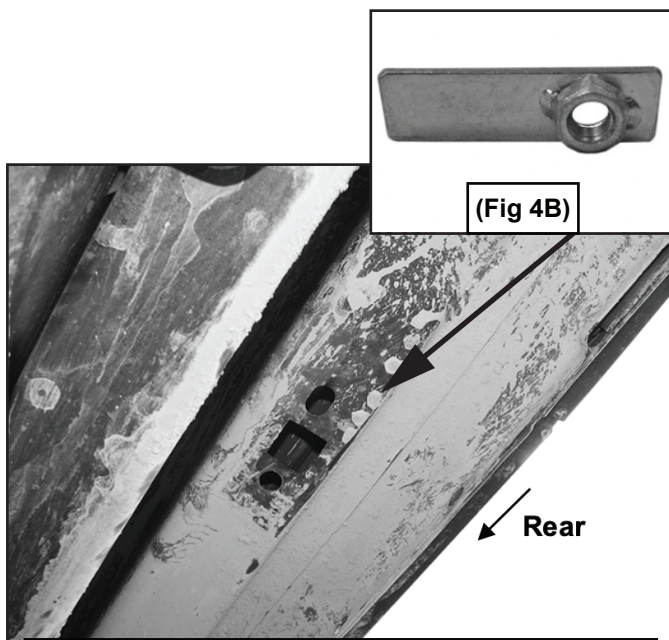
Passenger/Right rear mounting location (Model with threaded inset shown)
